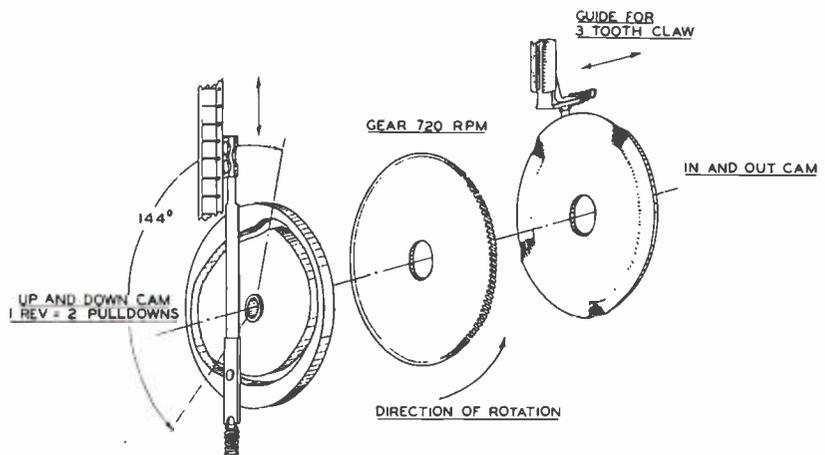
Diagram showing an exploded view of the TP-6A intermittent.
